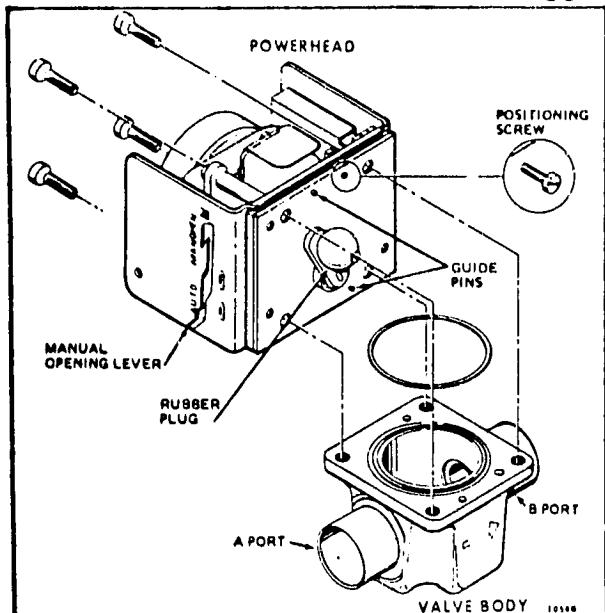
POWERHEAD MUST BE ALIGNED SO THAT THE GUIDE PINS AND THE POSITIONING PIN IN THE POWERHEAD FIT THE HOLES IN THE VALVE BODY.
